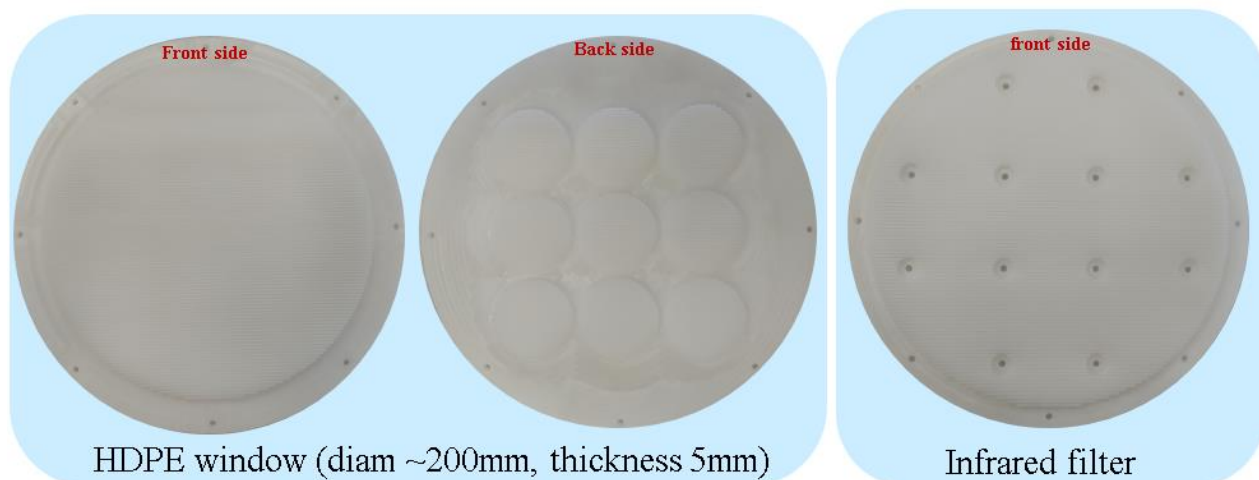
Left: Front and back side of machined HDPE window. Right: Machined PTFE infrared filter.
